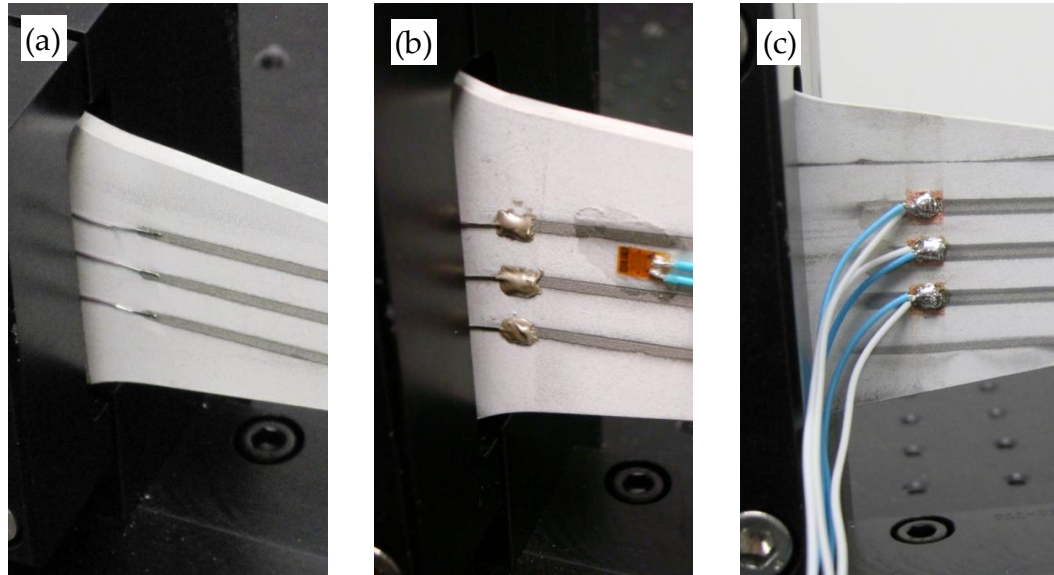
Illustration showing various lead wire bonding methods (a) welded leads, (b) leads cast in conductive epoxy, (c) leads soldered to wire arc sprayed copper pads
